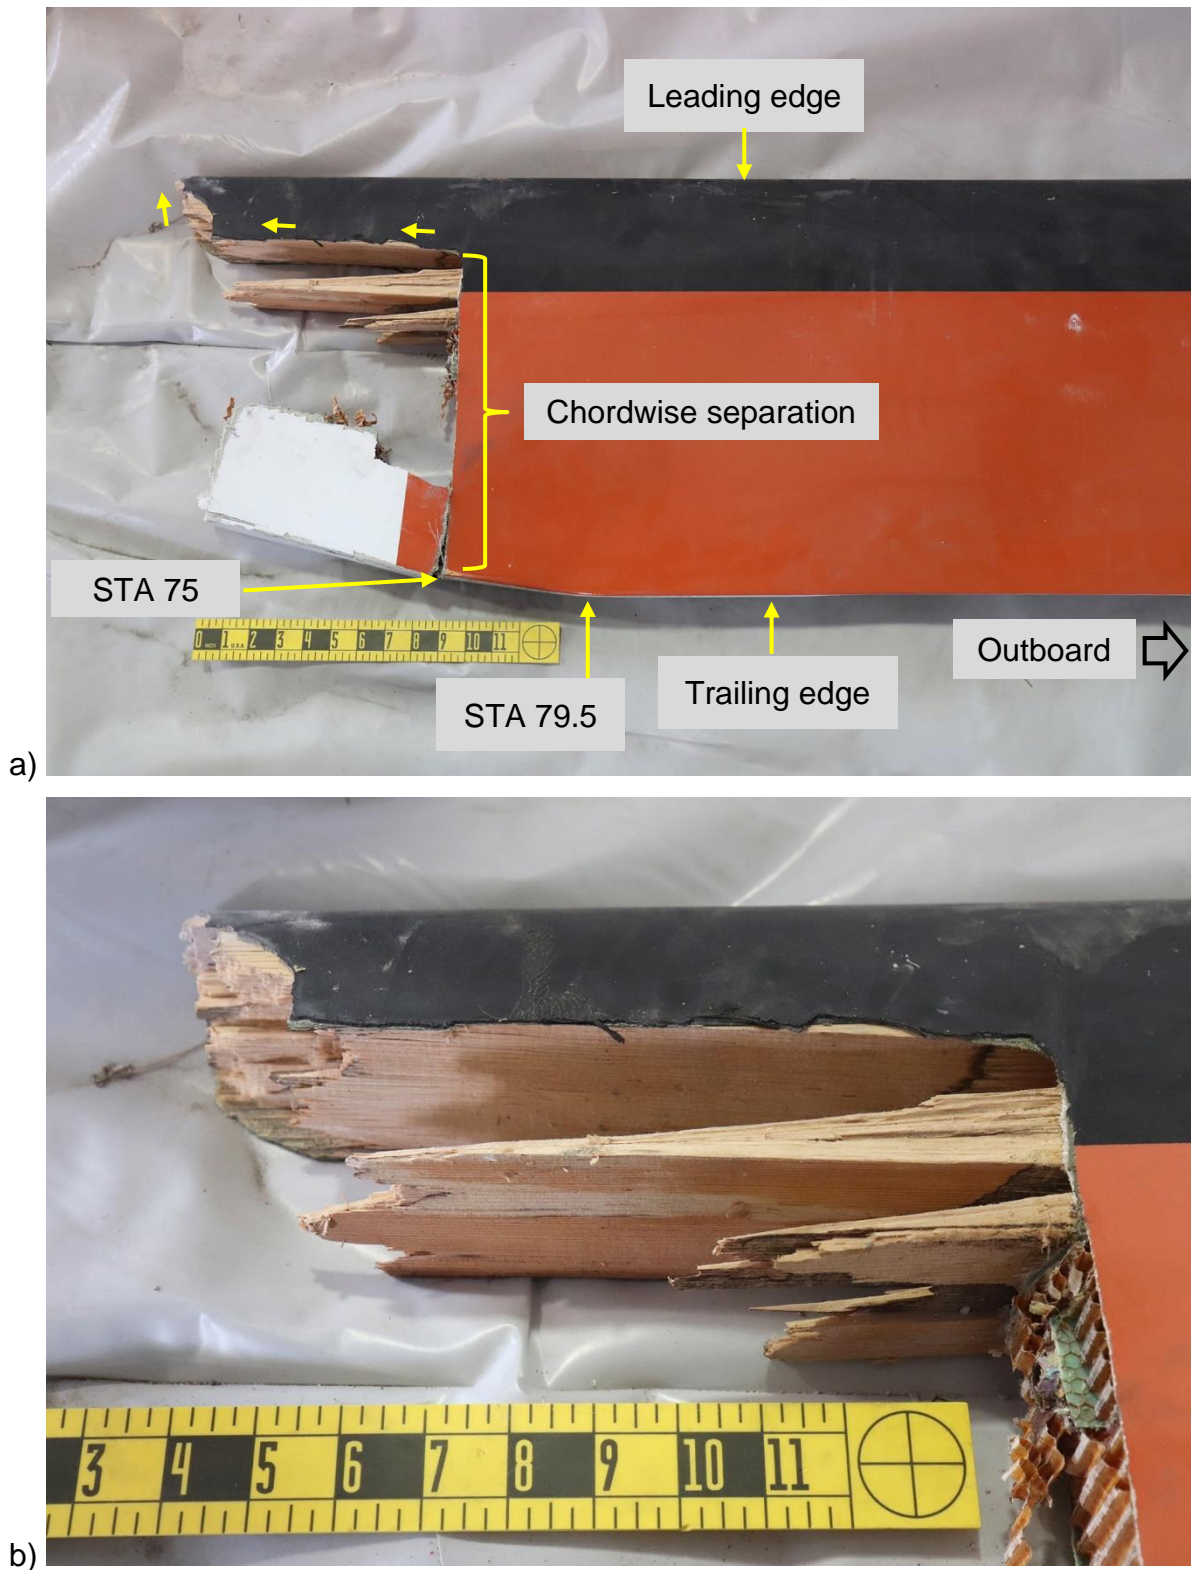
Outboard side of LHW (473A) main rotor blade root fracture: a) Overview image of the upper side and b) closer view of the spar fracture.
